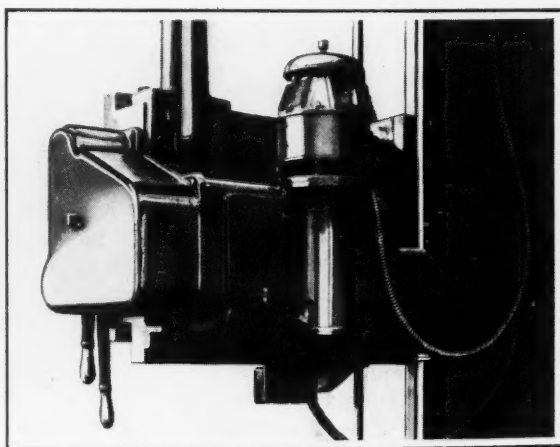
Motor for the Right-hand Head Installed on Back of Rail
